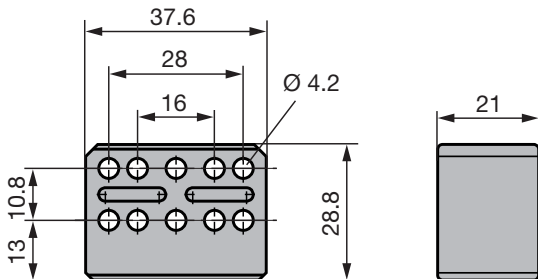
Installation dimensions of BTL6-A-3800-2 magnet
